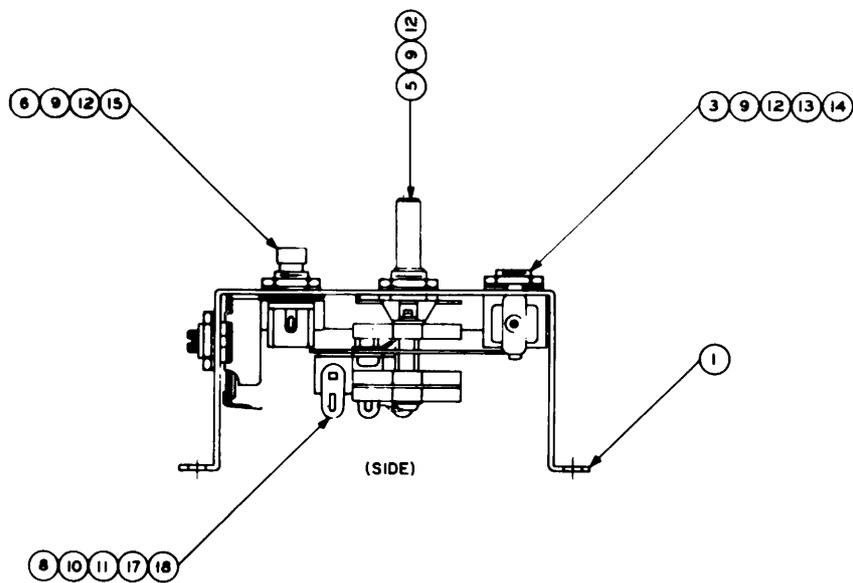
Switchframe mounting assembly, WW-5106-1C (part of wiring-chassis, figure 12).
